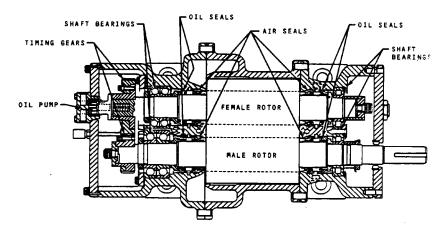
Sectional Plan View - Helical Screw Compressor
